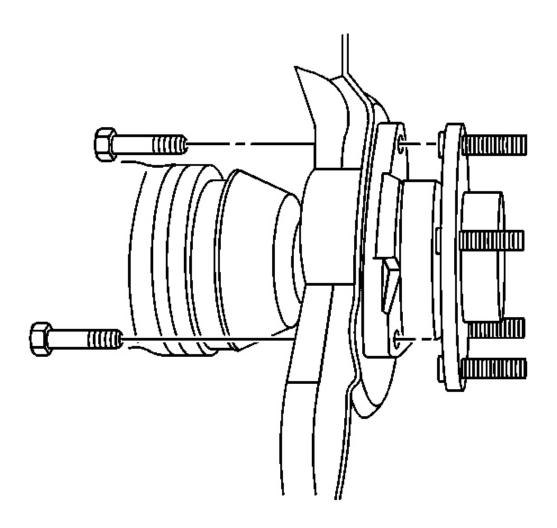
Wheel Hub & Bearing Mounting Bolts (4WD) Courtesy of GENERAL MOTORS CORP.
